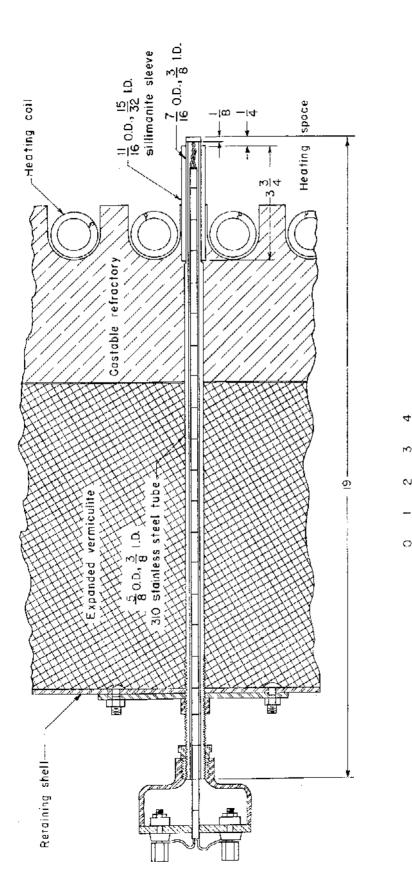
Modified protection tube for control thermocouples, small gasifier, Bureau of Mines, Grand Forks, N. Dak.
